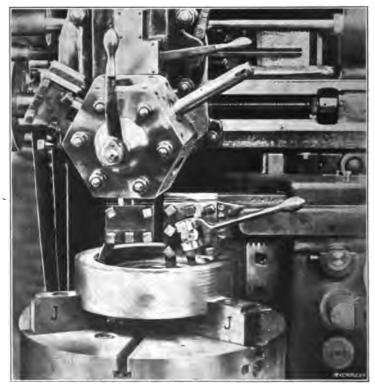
Turning Gasoline Engine Flywheel-Second Position
